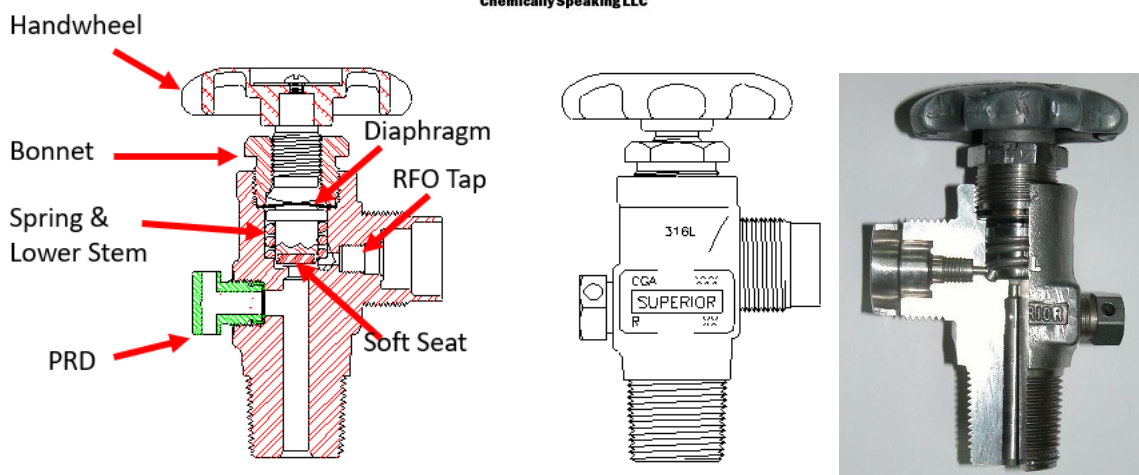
Superior 316 Stainless Steel Spring Loaded Metal Diaphragm Valve
